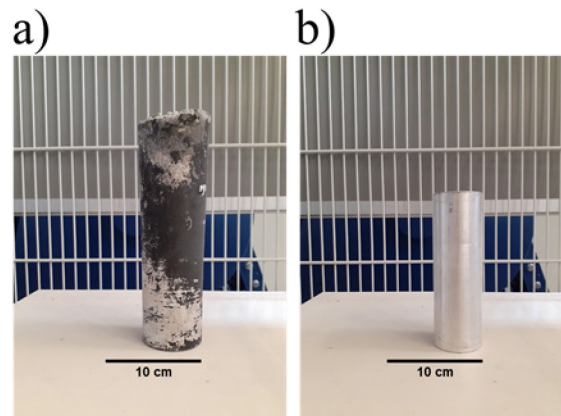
a) Billet after casting process, and b) prepared billet for extrusion processing.
